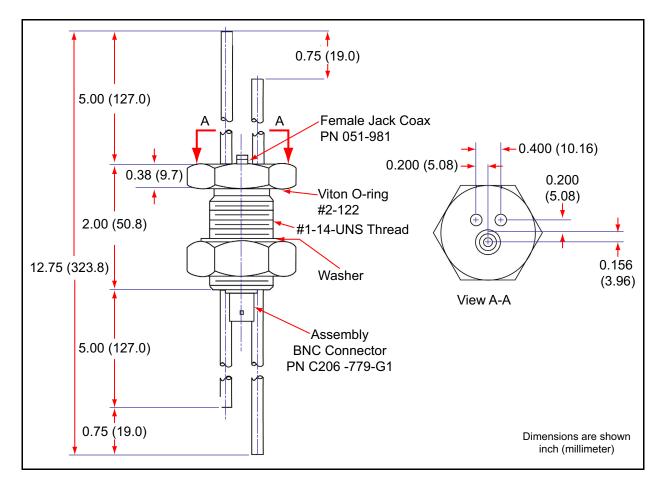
1 in. bolt feedthrough with three tubes, one electrical (PN 750-030-G1)
